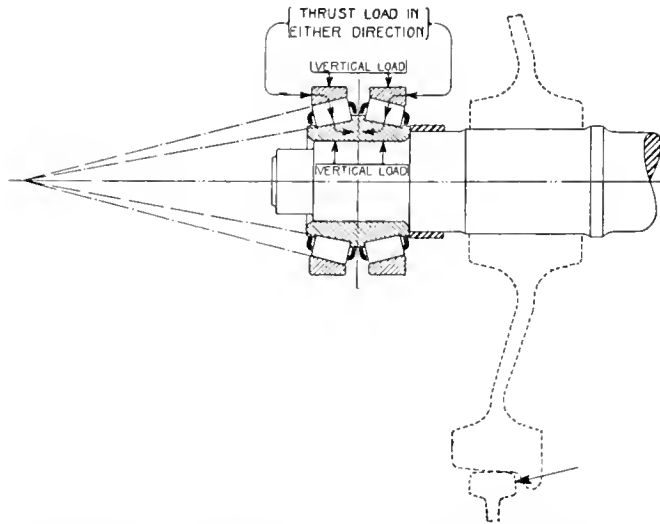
Diagram Showing How Tapered Roller Bearing Carries Vertical and Thrust Loads and a Combination of Each in One Bearing
